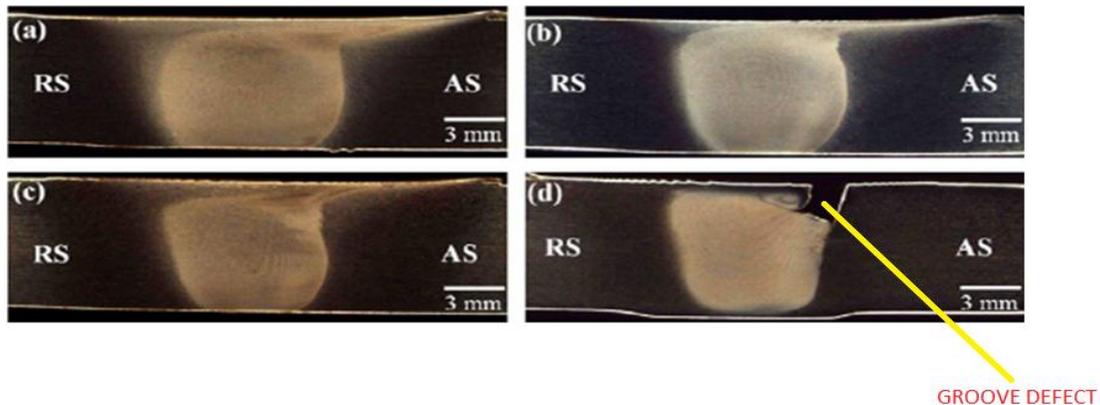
Cross sections of the welded joints at different welding speeds: (a) 50 mm/min (b) 100 mm/min (c) 150 mm/min and (d) 200 mm/min [64].
